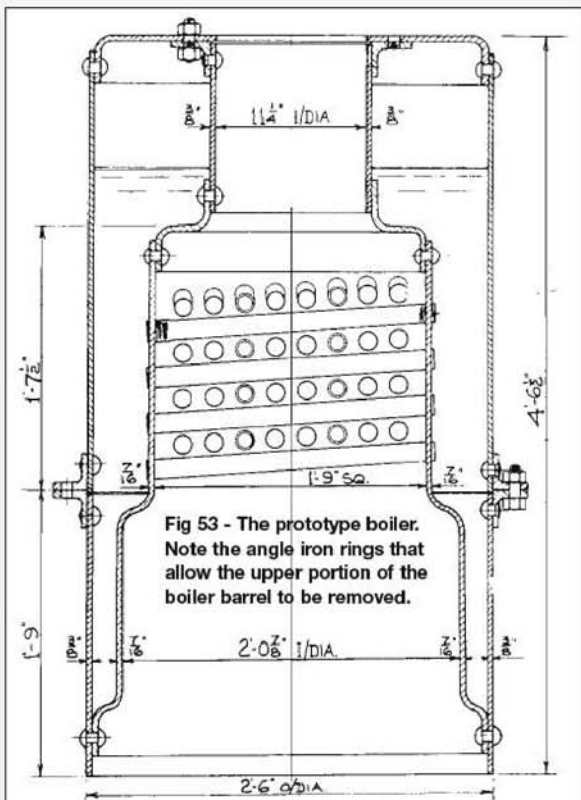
The prototype boiler. Note the angle iron rings that allow the upper portion of the boiler barrel to be removed.
